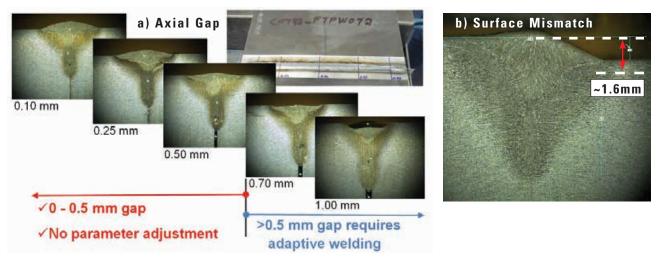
Joint tolerance for acceptable welds (a) Axial gap < 0.5mm (b) Surface mismatch < 1.6mm.
